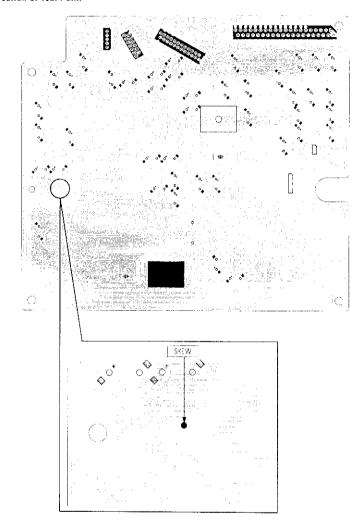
Location of test Point (DVD Main PCB - Bottom Side)
